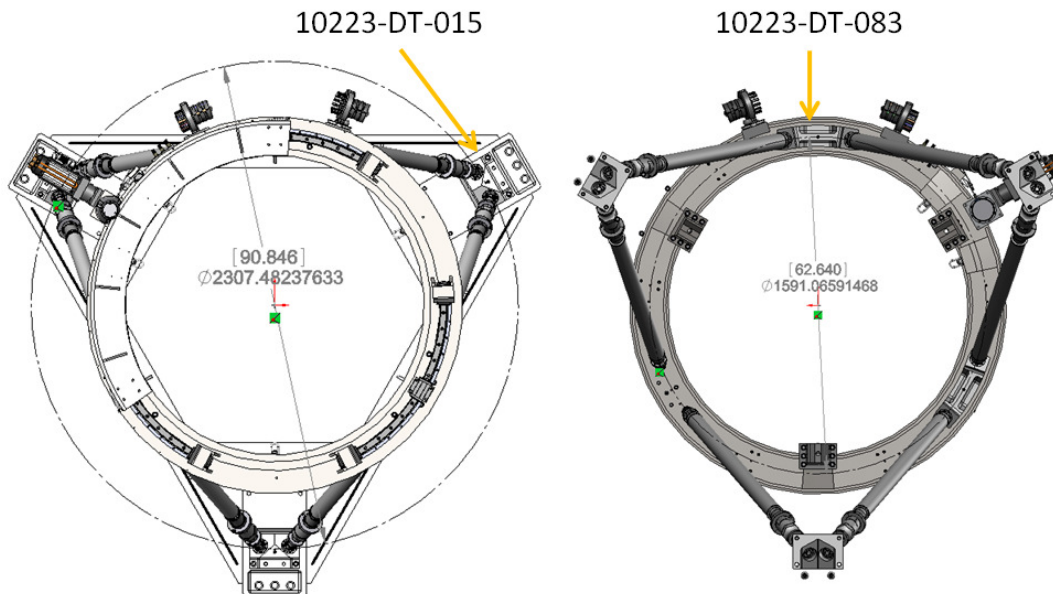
A top-view of the PFIP support structure assembly, 10223-AY-400, is shown (left) with some components missing to point out the location of the lower Rho blocks. A bottom-view of the same assembly is shown (right) to identify locations of the lower blocks [24]. The diameters of the circles formed by connecting the centers of the spherical bearings in the strut ends are also shown. This data can be used to determine kinematic behavior.
